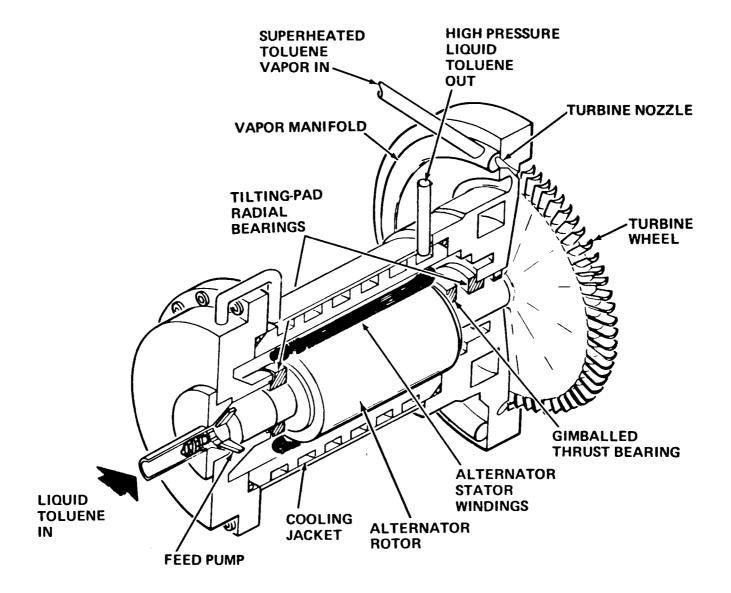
Turbine/Alternator/Pump (TAP) Assembly
